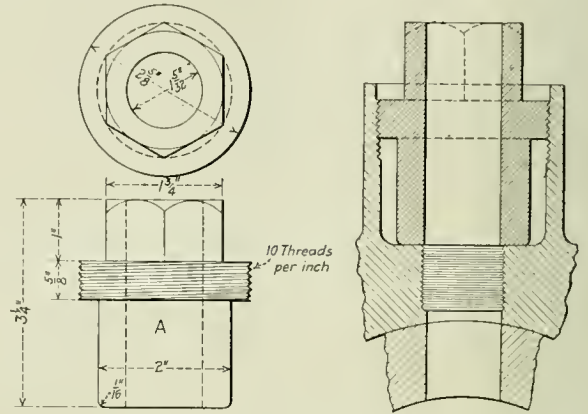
Jig Used in Drilling Rod Bushing Grease Plug Holes
